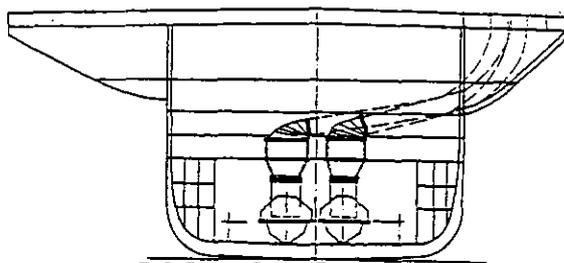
Transverse Section of Turbine Layout in the Rear Machinery Compartment
